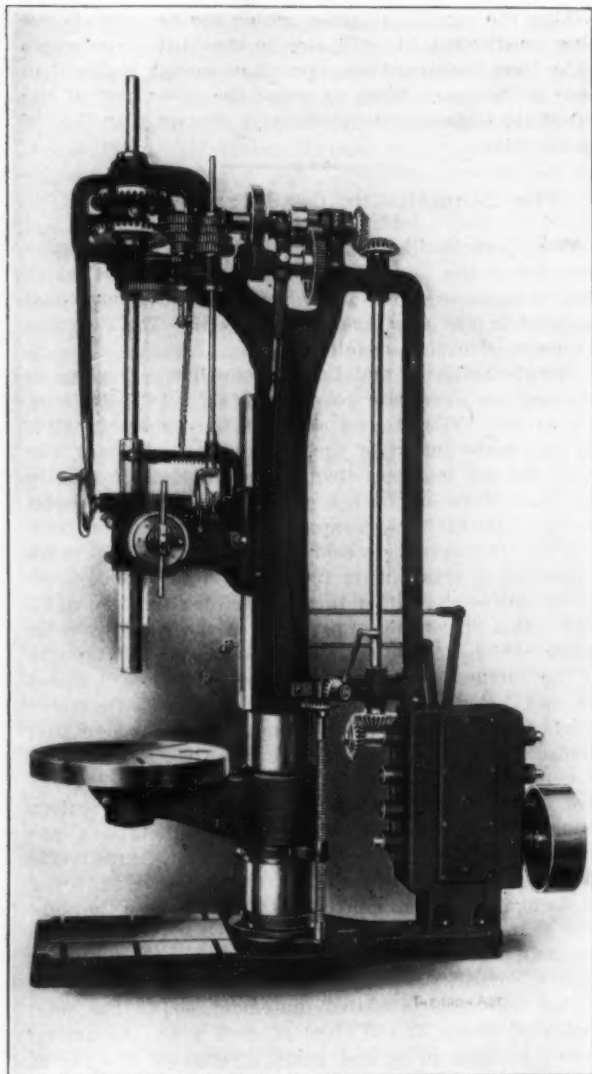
The New Gear Driven Upright Drill Built by the Prentice Bros. Company.
